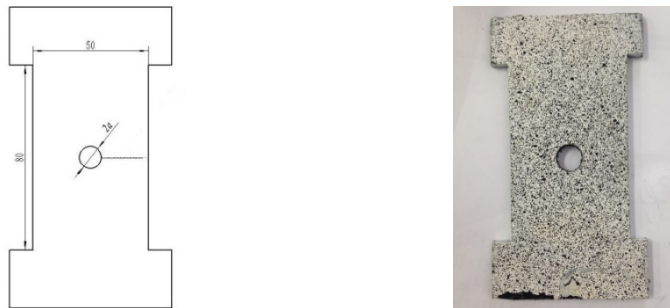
Experimental specimen. Left: specimen size (mm). Right: painted specimen.
